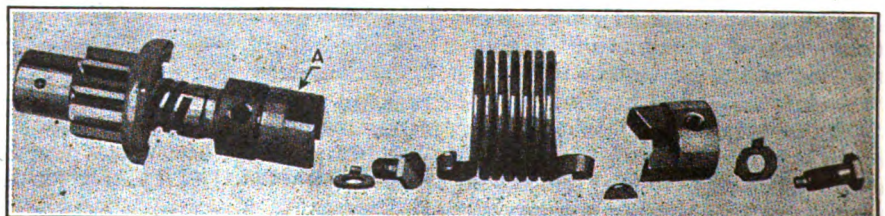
THE SHAFT AND GEAR OF THE BENDIX DRIVE AFTER THE SPRING HAS BEEN REMOVED.
